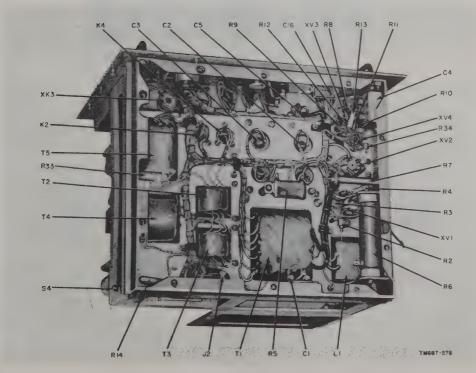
Power Supply PP-685/TRC, shield removed, bottom view.
